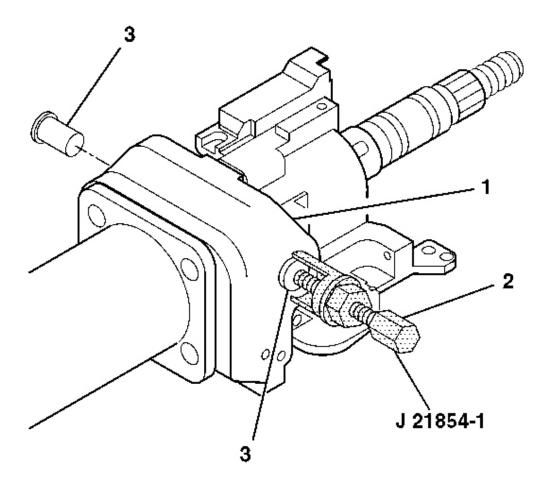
View Of Pivot Pins To Steering Column Tilt Head Assembly Courtesy of GENERAL MOTORS CORP.
